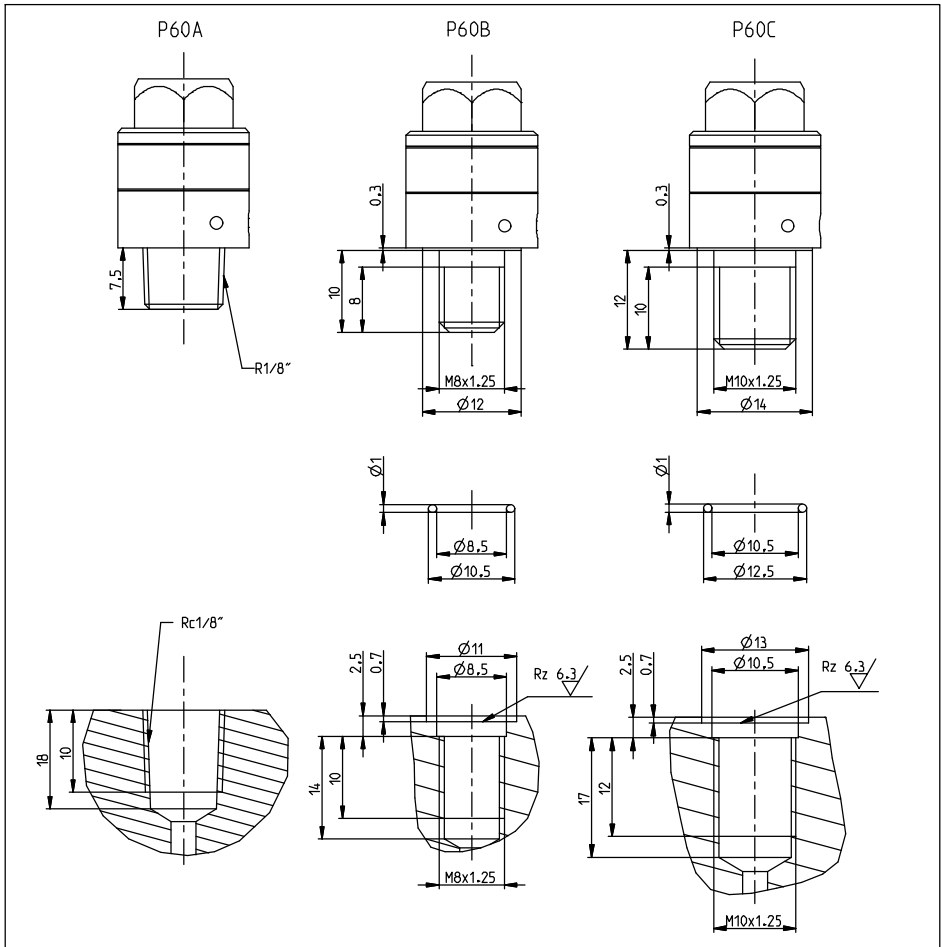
Geometry of sealing points for P60A, P60B and P60C pressure transducers
